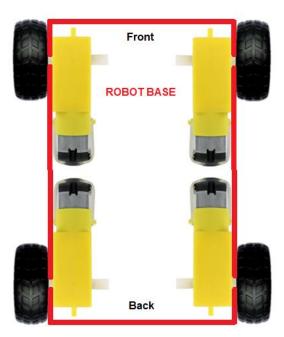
DC-GEARED MOTOR TO CHASSIS (4 MOTORS)
